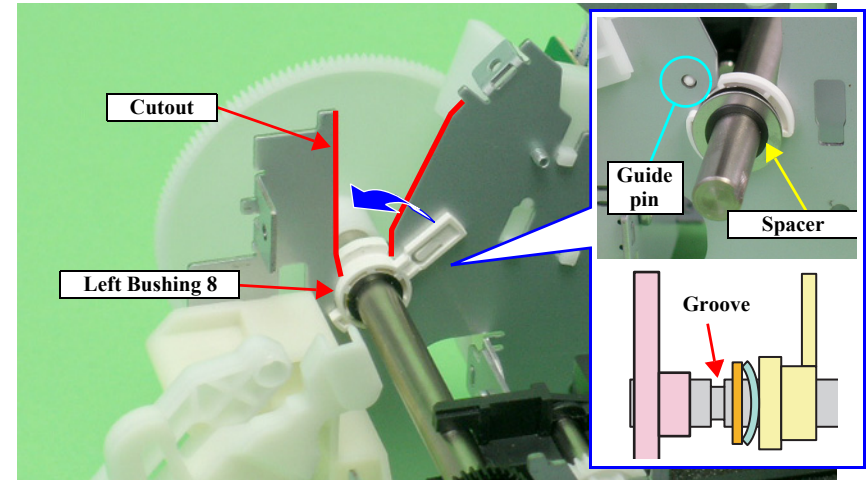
Removing the Spacer and Rotating the Left Bushing 8
